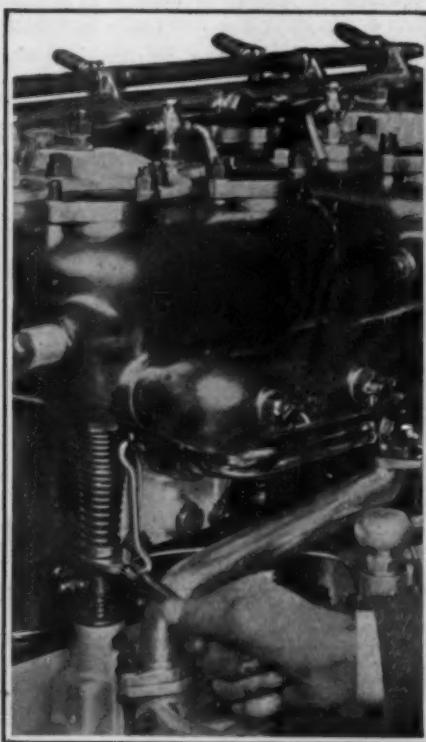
CROSSLEY VALVE REMOVING TOOL
